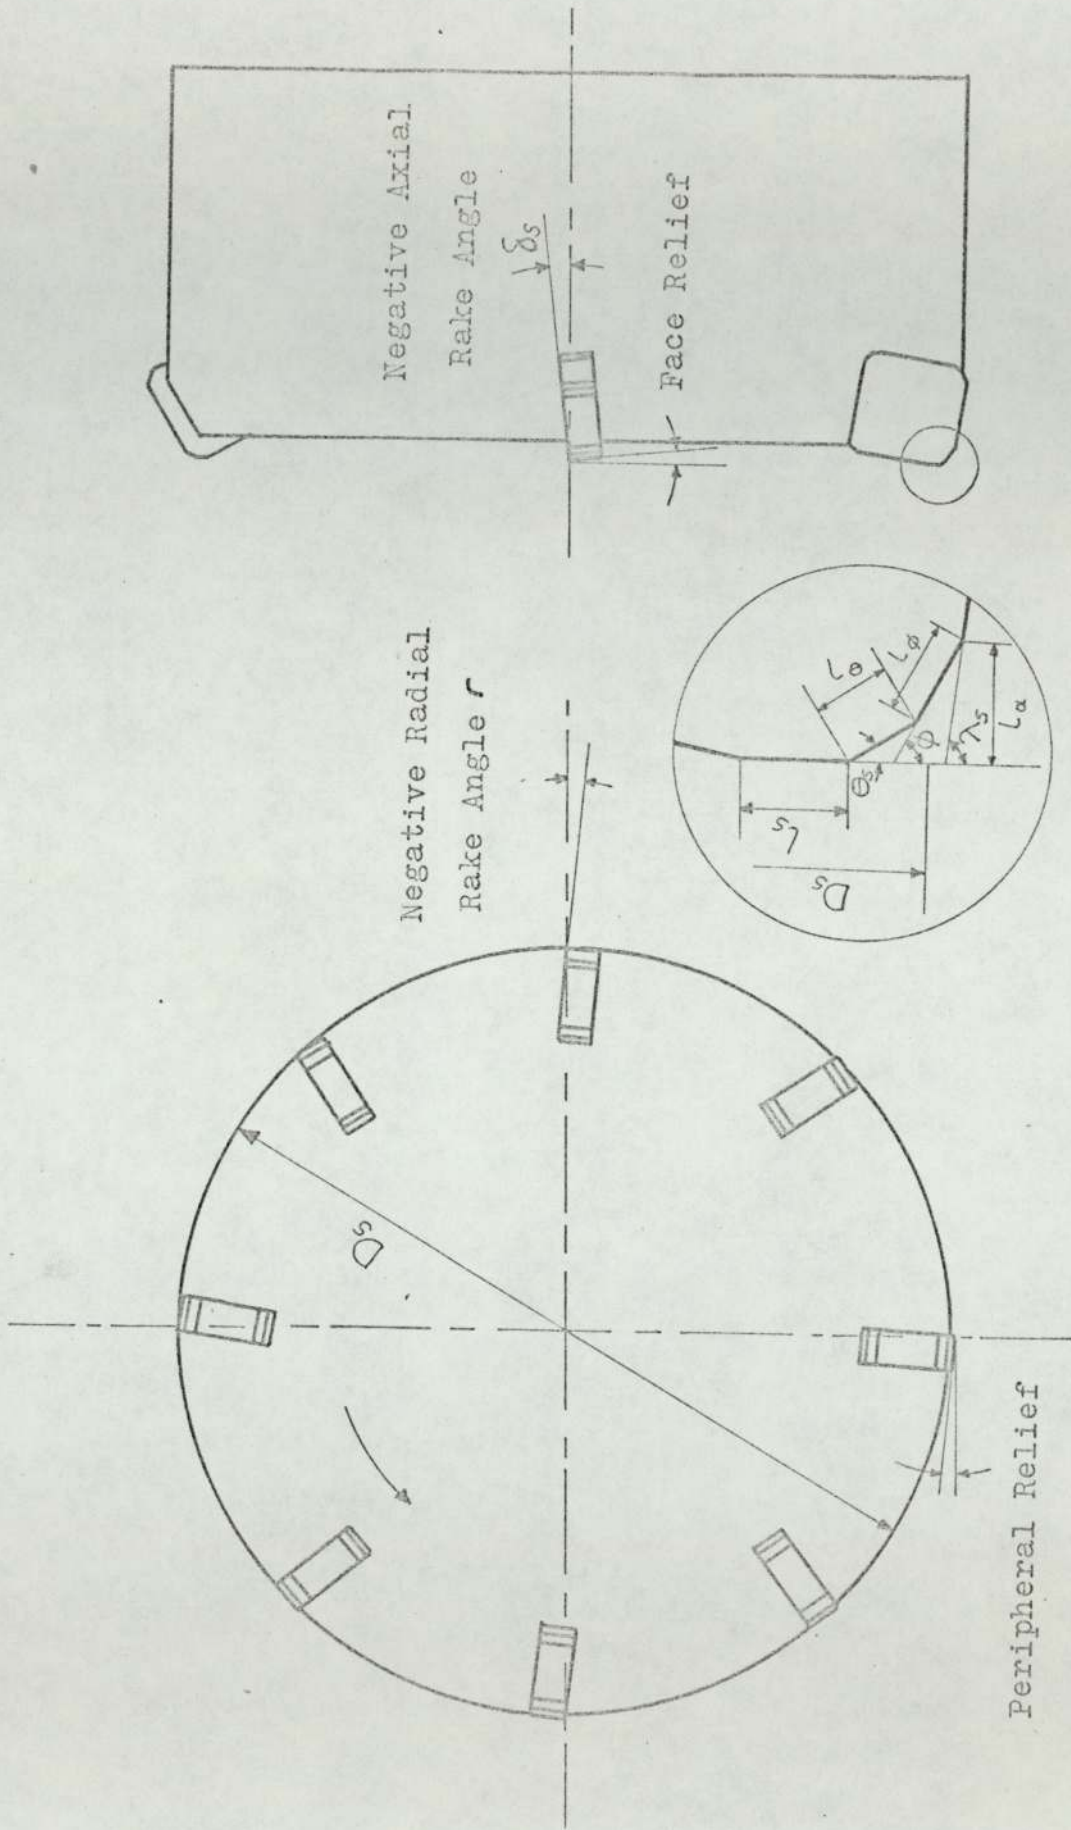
T-Max 265.1 Sandvik Milling Cutter with Indexable Right Hand P25 Inserts
